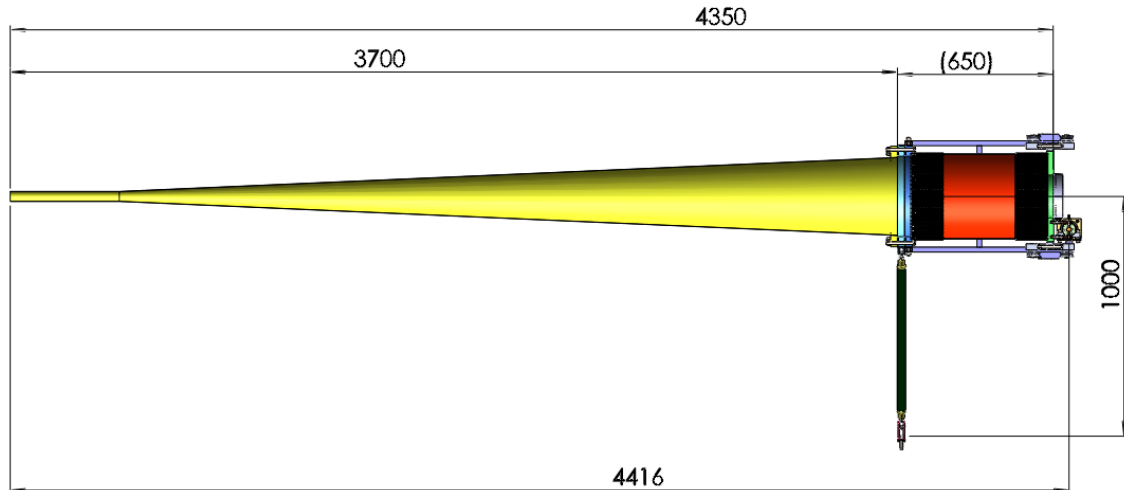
Scheme of tilting joint placement and kinematic mechanism position
